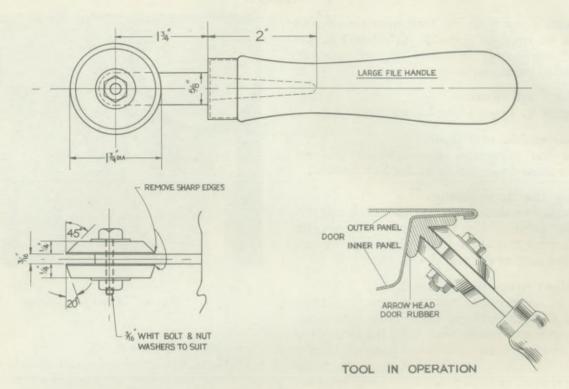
Details for manufacture of "squeegee" for securing door sealing rubbers
